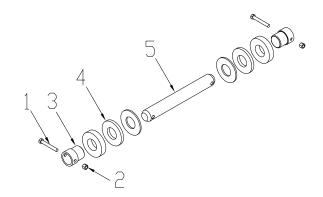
Mounting Kit for "XSF" Top Frame – Typical Components Include: 1- Bolt, 2- Nut, 3- Flange Bushing, 4-Spacer, 5-mounting Pin
